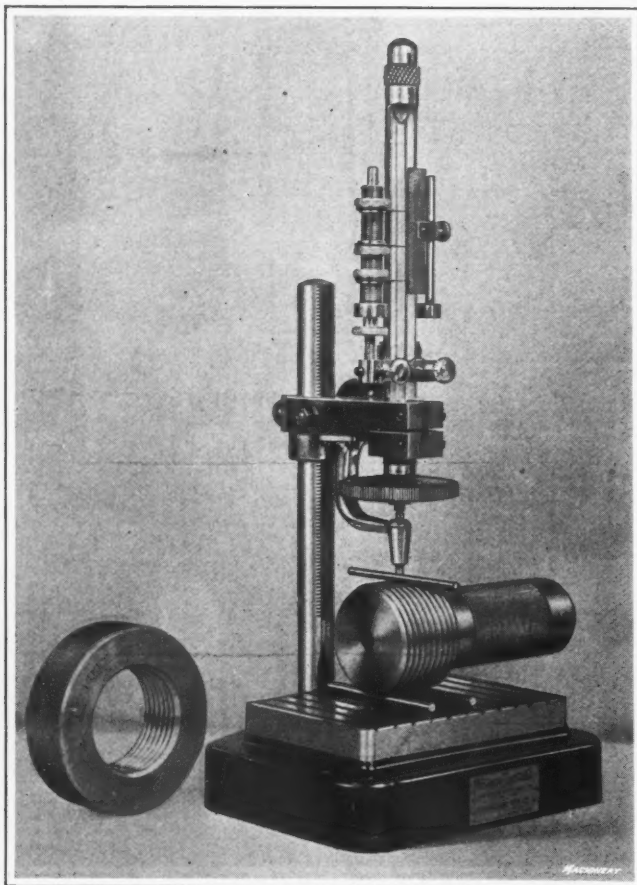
Simple Type of Thread Comparator built by Coats Machine Tool Co.
